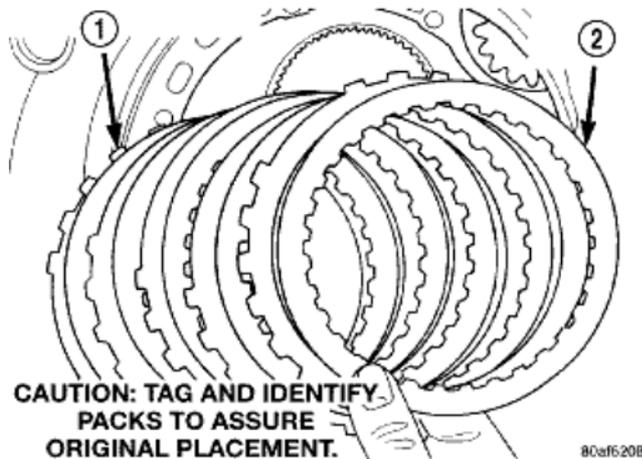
Removing/Installing Low/Reverse Clutch Pack
